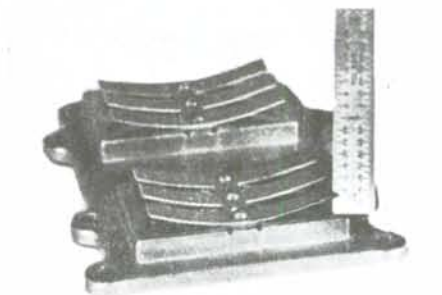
Reed stops should be 3/16 inch from seating surface of reed plate.
